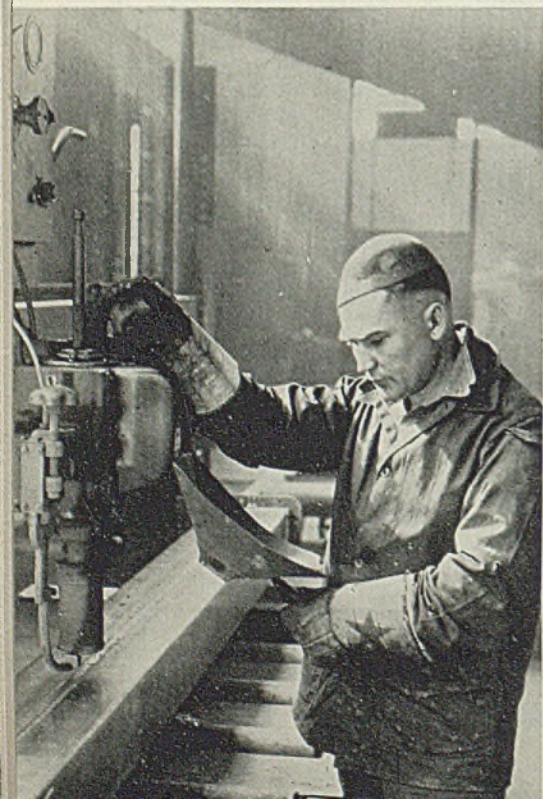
In welding this rectangular tube from channel sections, the work is moved along underneath the welding head by power driven rollers of the conveyor table
